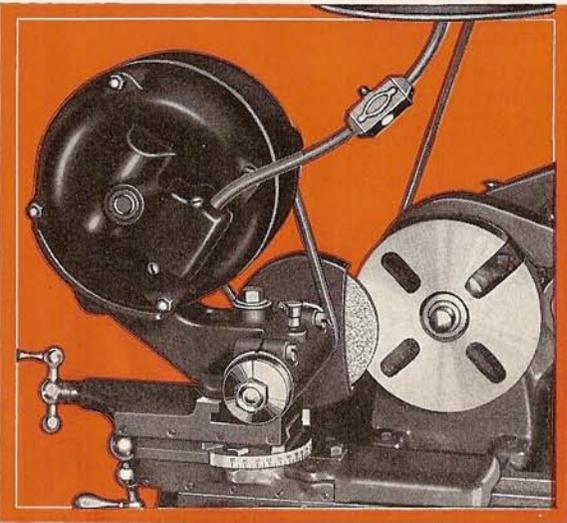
Electric Grinder Mounted on Compound Rest of Lathe
